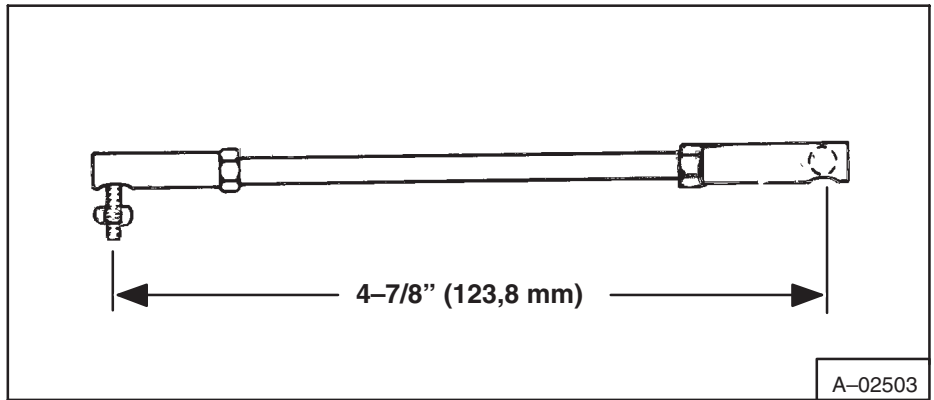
C-5 Linkage Adjustment (Governor to Carburetor)
